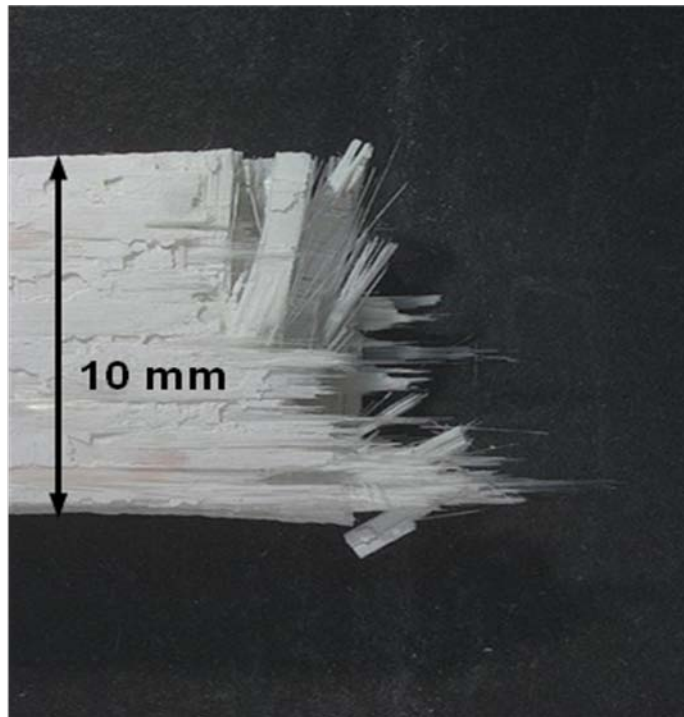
Fracture surface of the N720/AM specimen tested in tension to failure at 1100°C in laboratory air.
